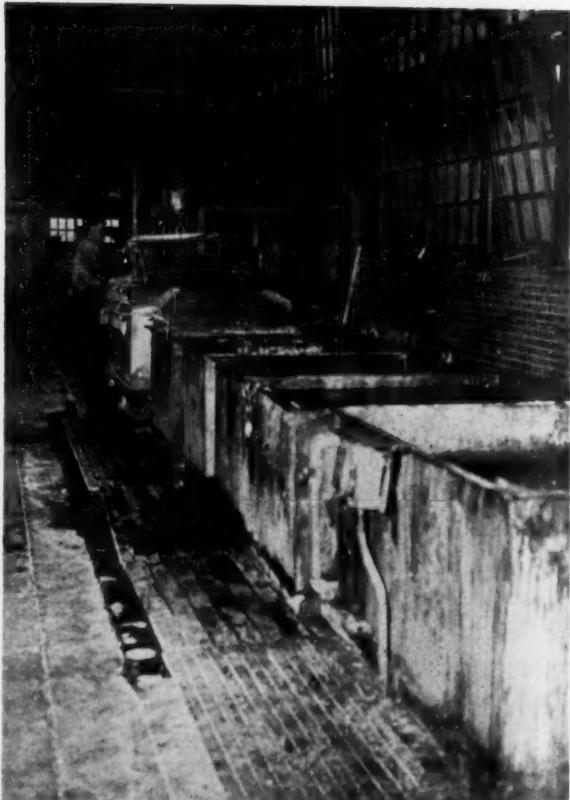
Line of cleaning and pickling tanks for removing heavy oils from parts before galvanizing.
